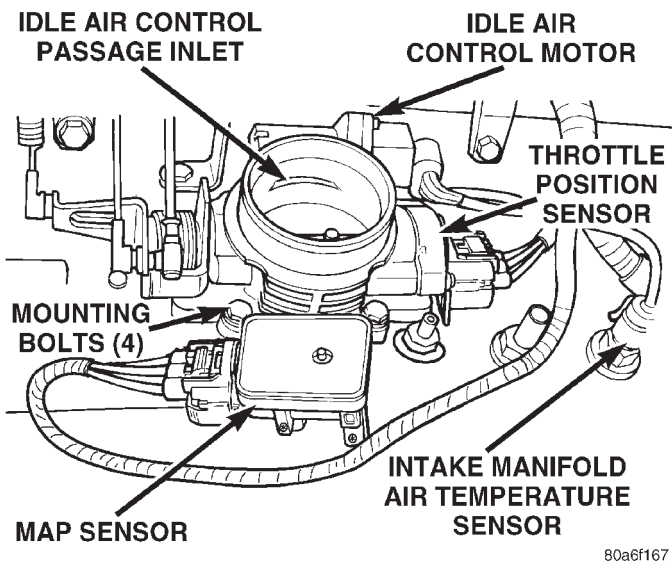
Throttle Body and Sensor Locations—4.0L Engine
